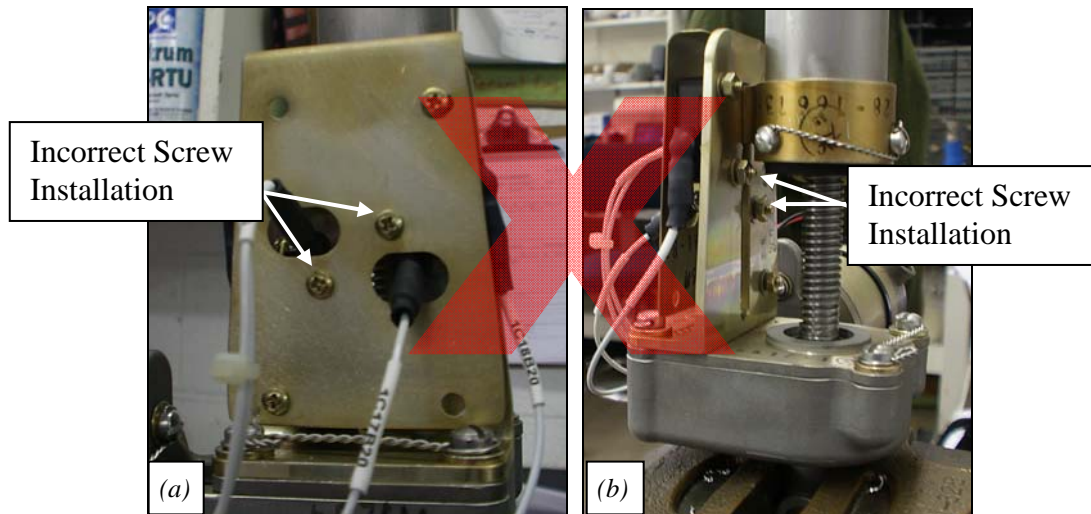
Improperly Installed Screws (a) (b) – The shanks of the inner screws face the spring capsule (b). (The trim actuator is removed from the aircraft.)
